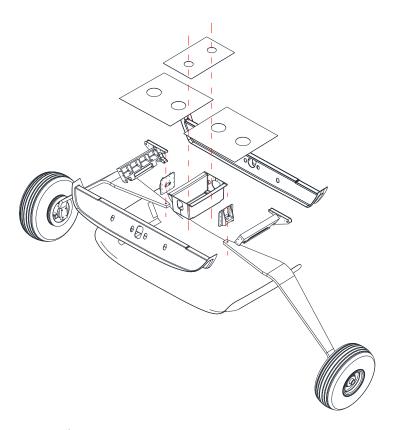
MAIN LANDING GEAR STRUCTURE
